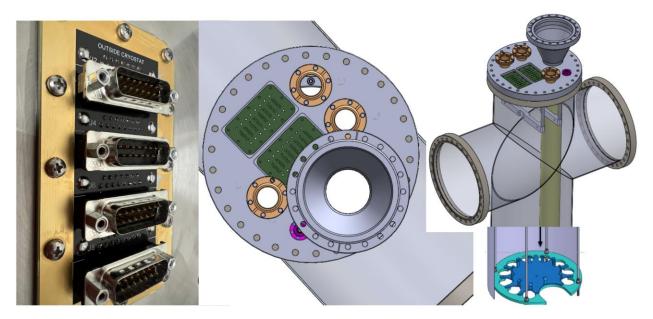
Membrane-mounted XA flange and feedthrough assembly.
